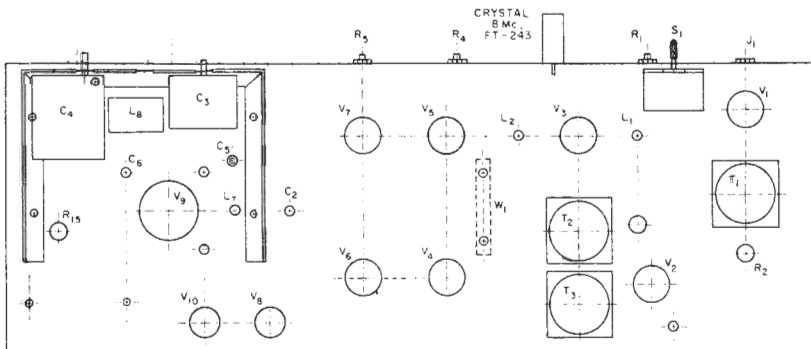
Top-of-chassis layout of the 6-meter s.s.b. transmitter. This drawing is to scale and may be used for layout dimensioning; 1/4 inch in the drawing above equals one inch of actual chassis size.
